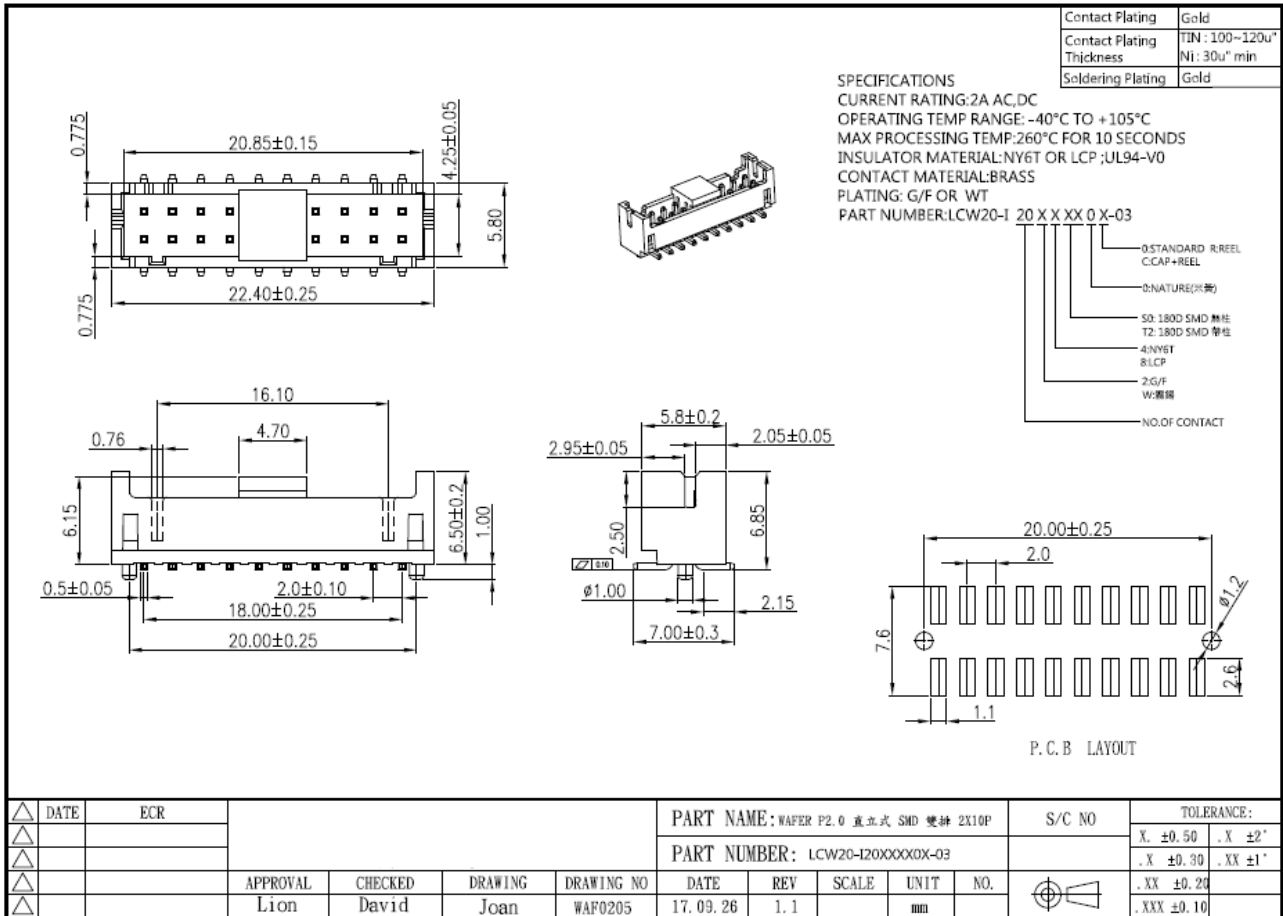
Wire to Board SMD 2*10P Connector Drawing
